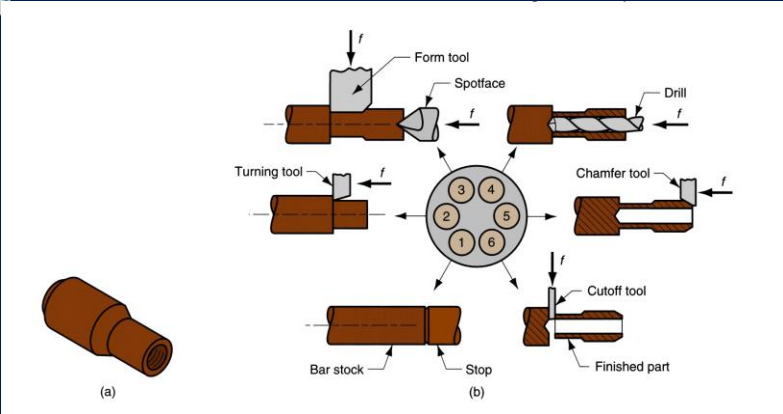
(a) Part produced on a six-spindle automatic bar machine; and (b) sequence of operations to produce the part: (1) feed stock to stop, (2) turn main diameter, (3) form second diameter and spotface, (4) drill, (5) chamfer, and (6) cutoff
